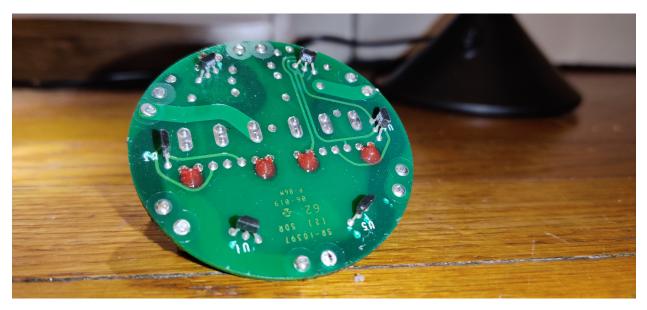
Rear view of the Motor PCB after removing from the motor, with 6 hall effect sensors, to measure rotor position
